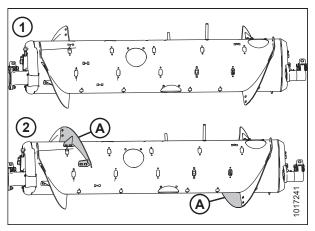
Auger Configurations – Rear View 1 - Wide Configuration 2 - Medium Configuration
